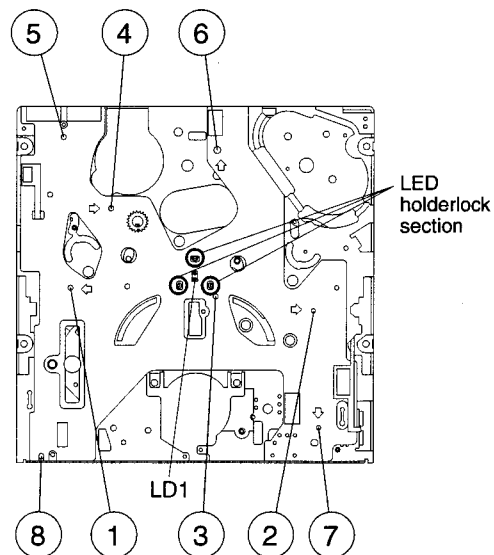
(2) — Mechanism unit bottom side —
